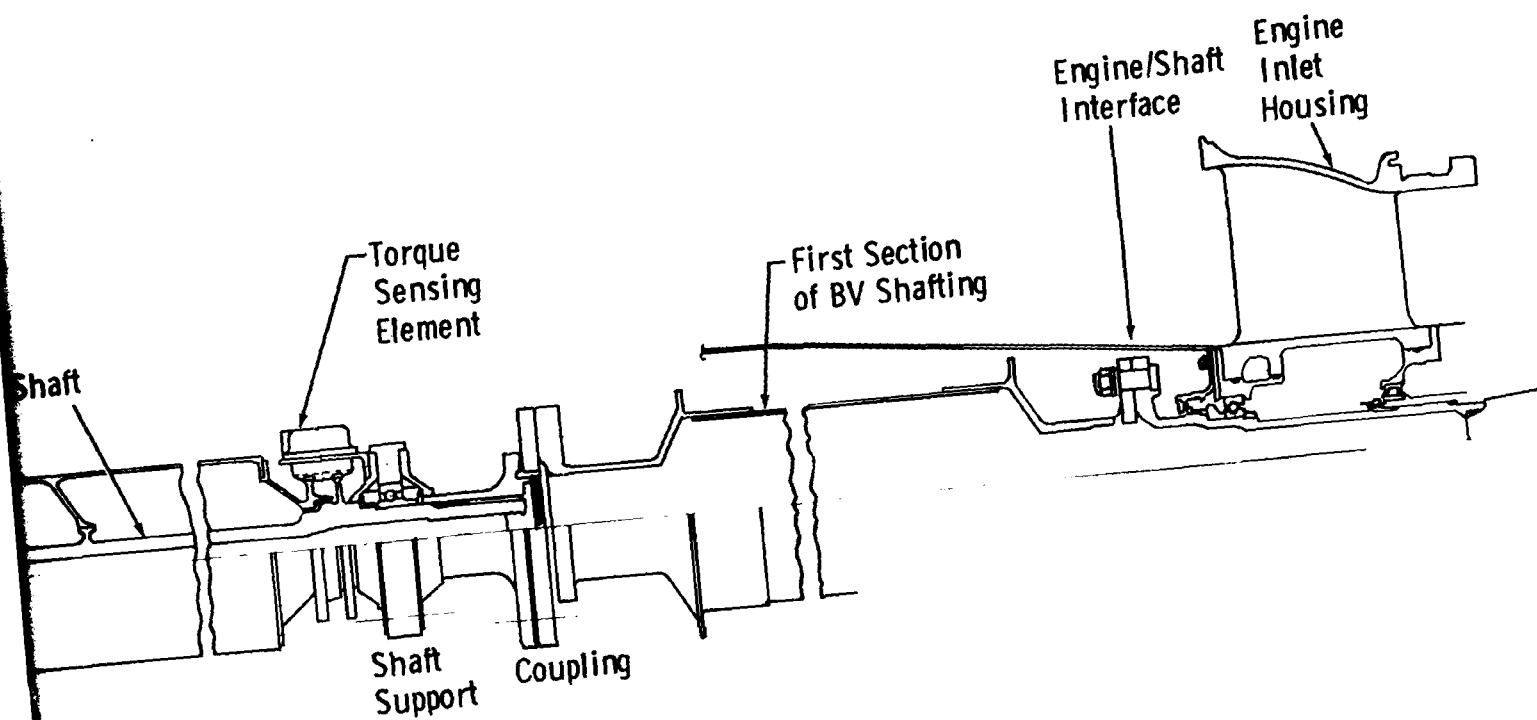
Layout of Shaft-Contained Torquemeter Configuration.
